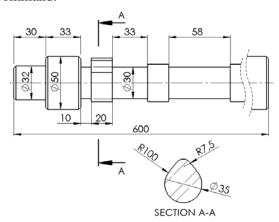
Automatic creation of a camshaft drawing with the insertion of control dimensions
